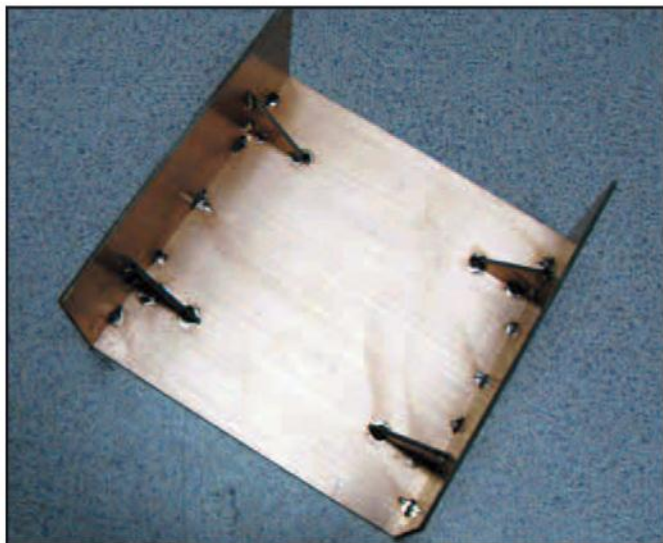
Photo H. Note that the solder end stitches for the cover are not at the edges. This is to allow for the 1/8-inch overhang, to keep the bottom chassis edge from contacting the solder stitch of the cover when assembled.
